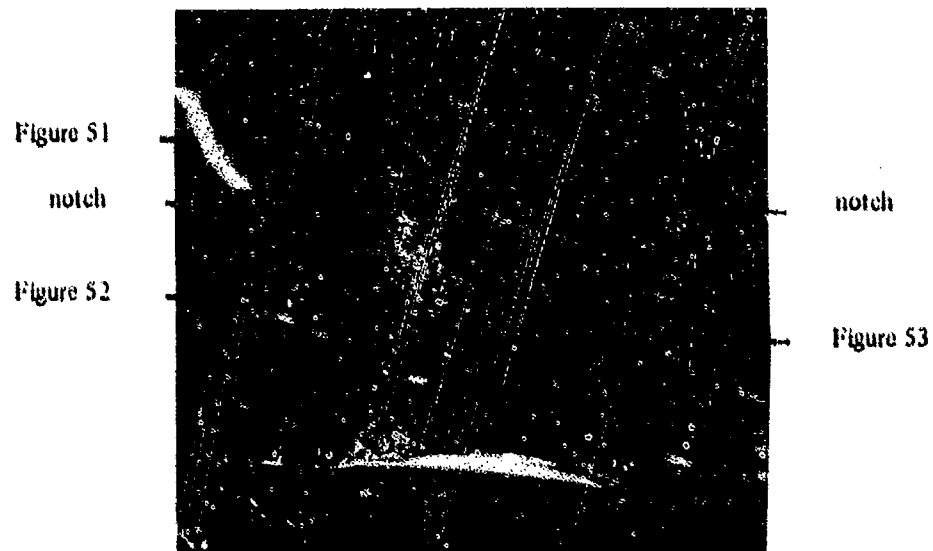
Fatigue fracture surface of a T-1 steel plate specimen, 10x.
